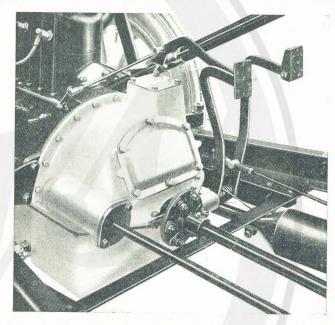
The Clutch and Flywheel Casing of the 11 h.p. "Standard" Chassis.
